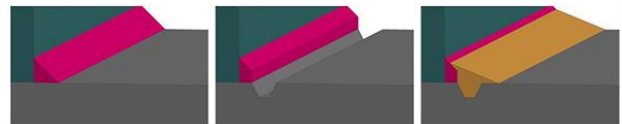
Schematic drawing of seams repair. Fillet weld (left), milled part (center) repaired seam (right)
